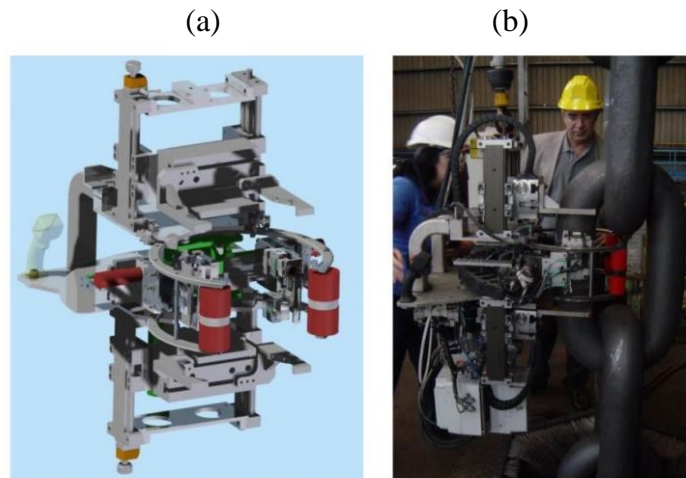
The CIRUS manufacturing chain inspection robot (a) CAD design (b) field test [25]
